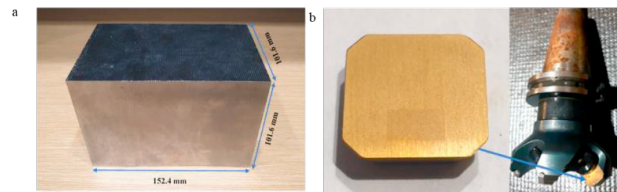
(a) workpiece; (b) cutting insert and tool holder.
